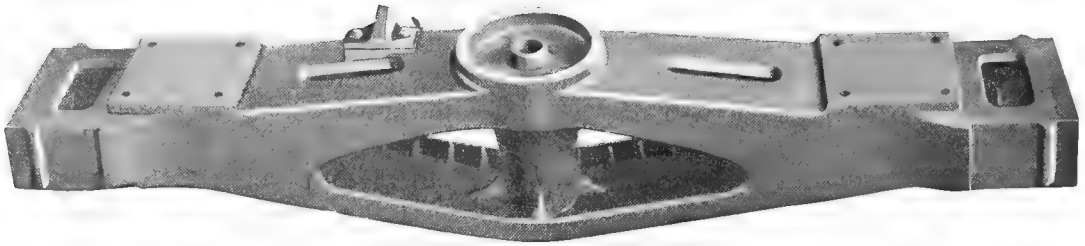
Buckeye Cast Steel Truck Bolster for Freight Cars. Buckeye Steel Castings Company.
